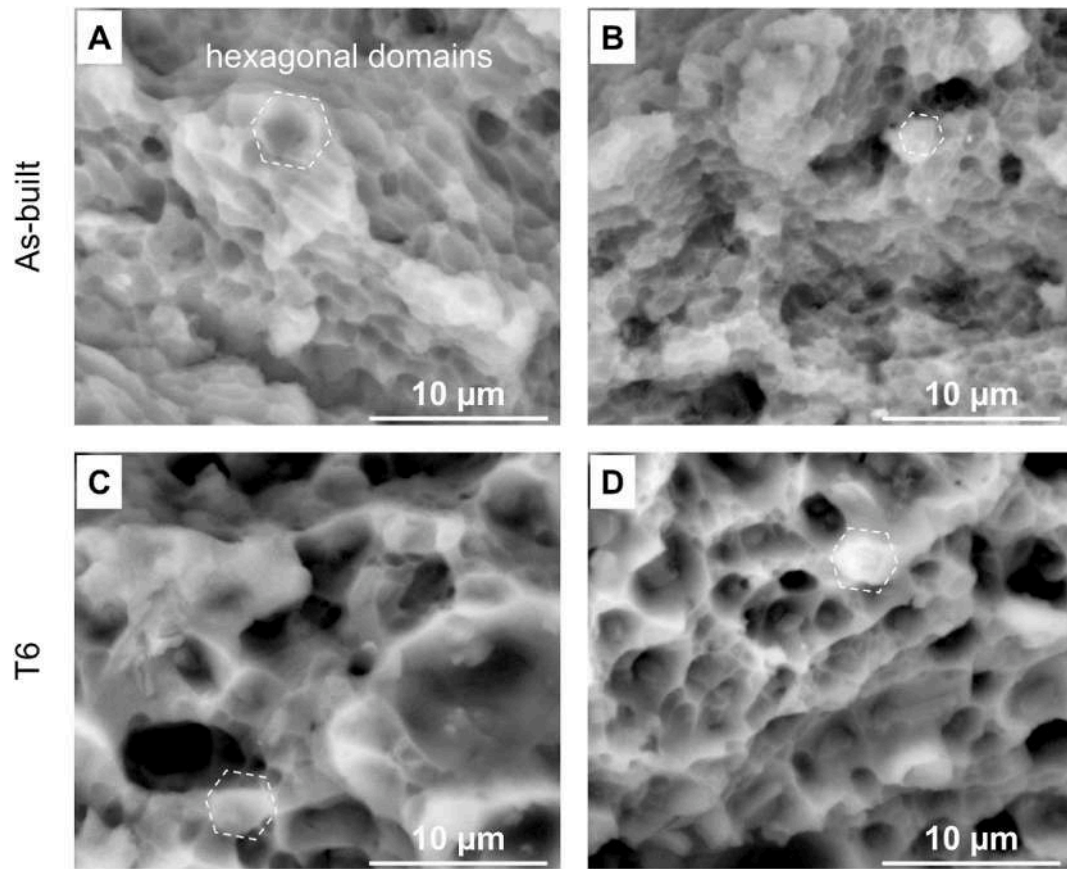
Fracture surfaces of “average samples”: third final zone. A) XY-AB; B) Z-AB; C) XY-T6; D) Z-T6.
